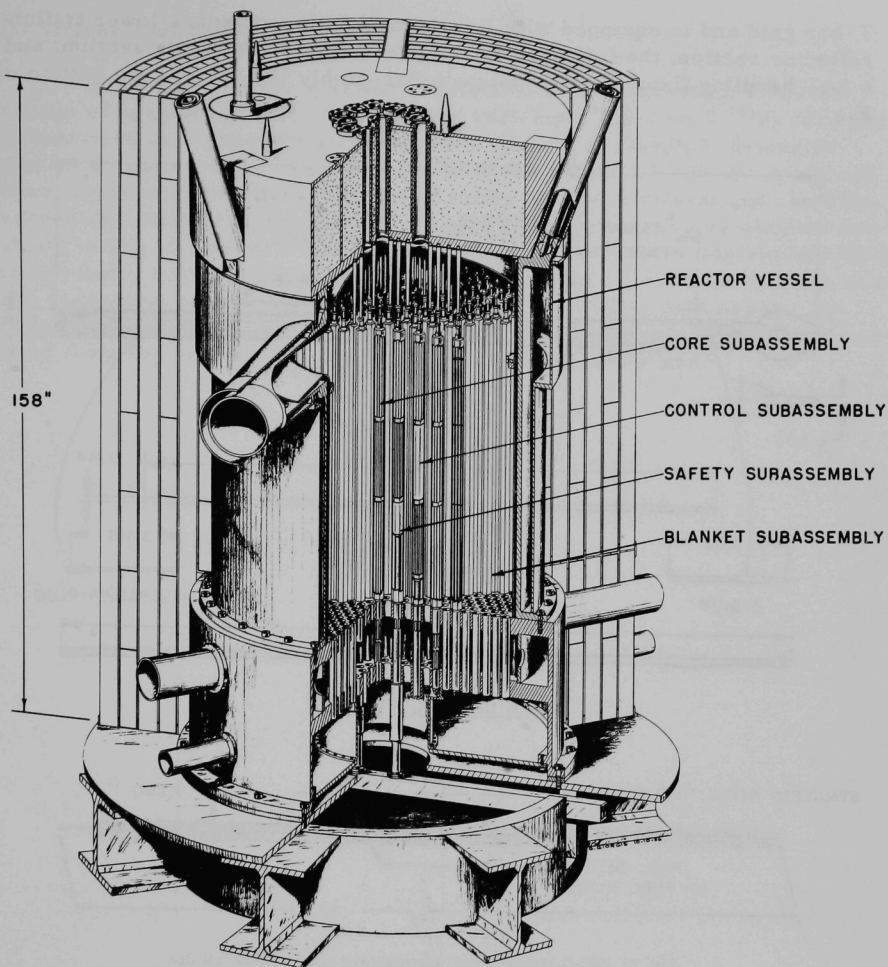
Cutaway View of EBR-II Reactor Vessel
